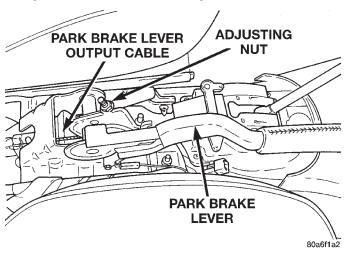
Park Brake Lever Output Cable Adjustment Nut
